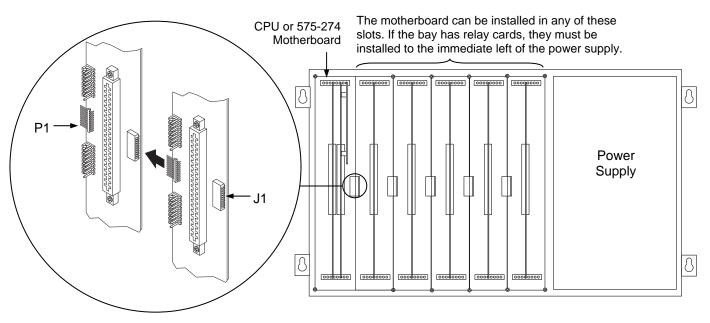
Installing the Motherboard into a 4100 Master Controller Bay
